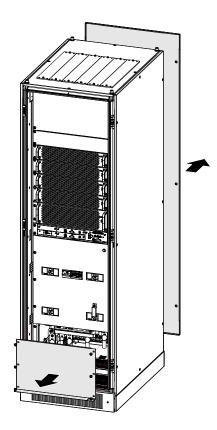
Dismantle the bottom wiring plate and rear plate
